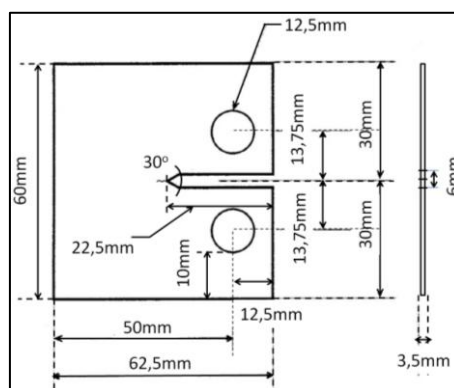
Specimen geometry and dimensions for mechanical experiments.
